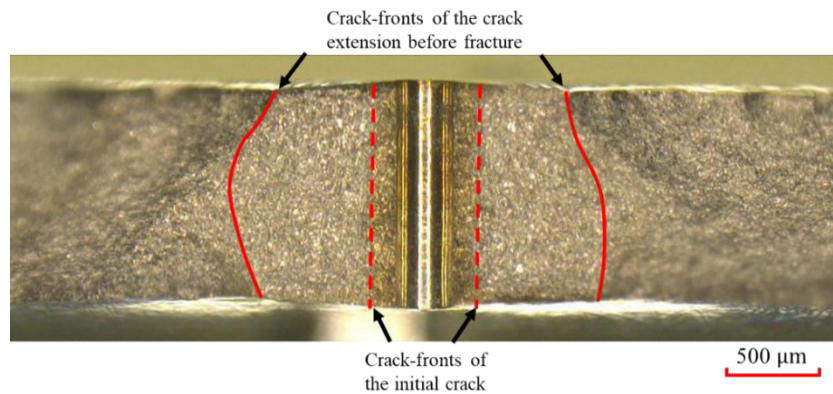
Fractographic analysis with optical microscope of the fracture surface at crack plane of the biaxial specimen C2 (lower part).
